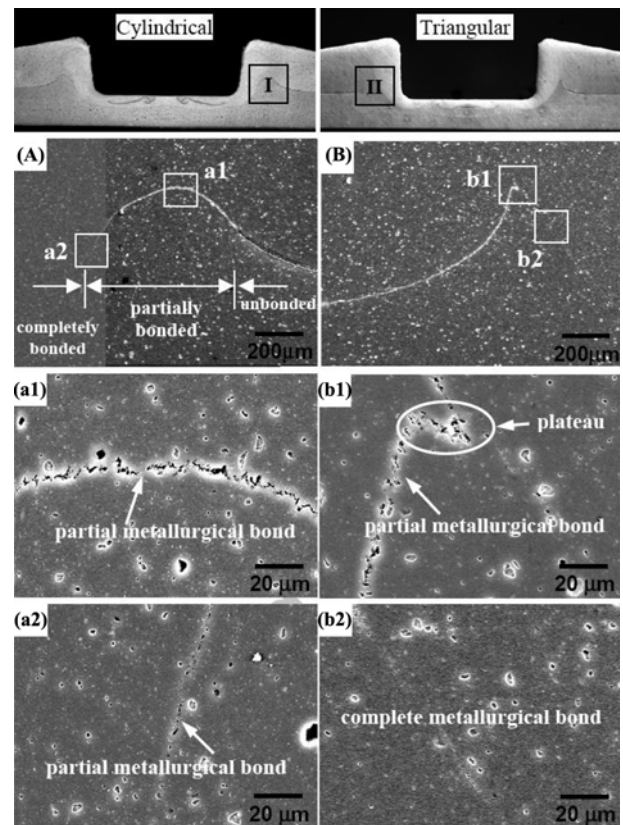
Cross-sectional macrostructures of the welds for the cylindrical pin (left) and the triangular pin (right): (A) magnified view of the hook geometry in region I for welds by the cylindrical pin with (a1) and (a2) showing partial metallurgical bonding within region I at the locations indicated; (B) magnified view of the hook geometry in region II for welds by the triangular pin with (b1) and (b2) showing partial and complete metallurgical bonding in region II at the respective locations indicated [18].
